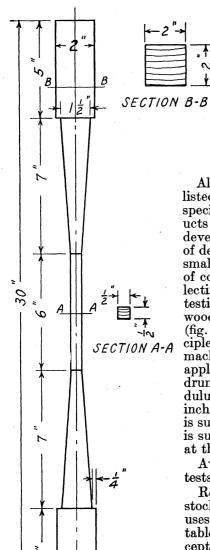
Details of tension-parallel-tograin test specimen.
